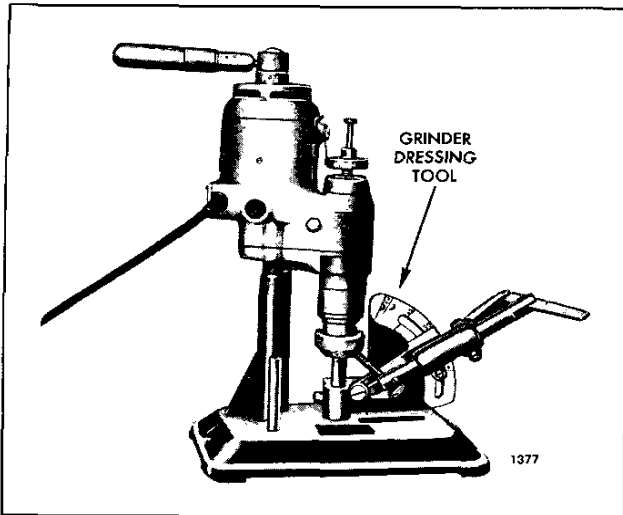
Grinding Wheel Dressing Tool of Set J 8165-1
